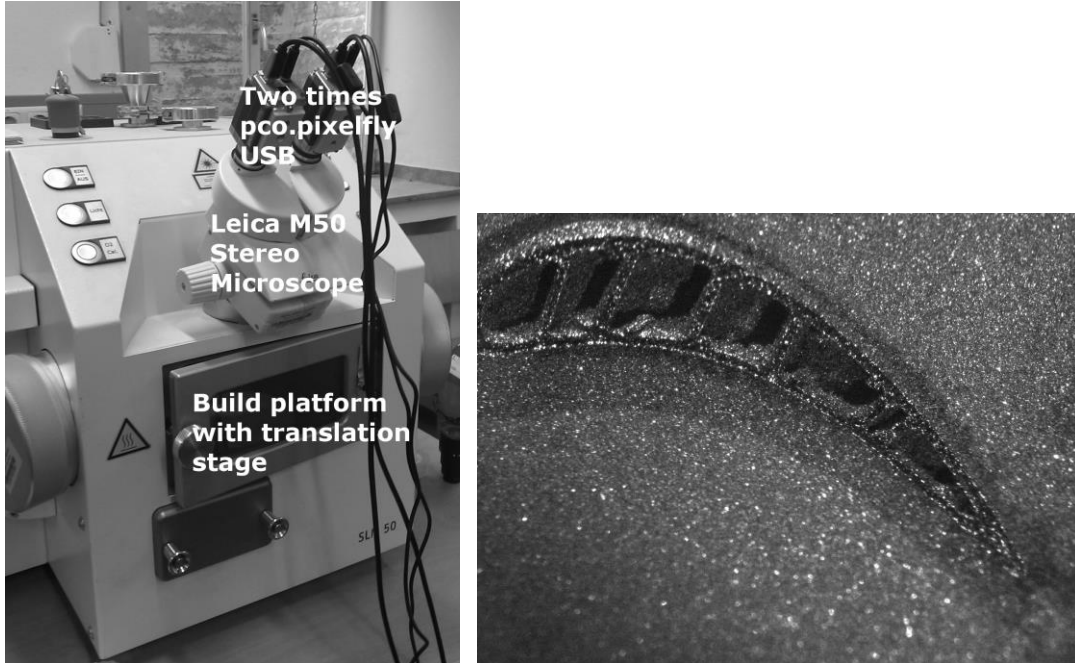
(a) the SLM machine used in [87] with a standard stereo microscope imaging mounted on it, (b) image captured from the left microscope from a built turbine blade on the machine after powder removal.
